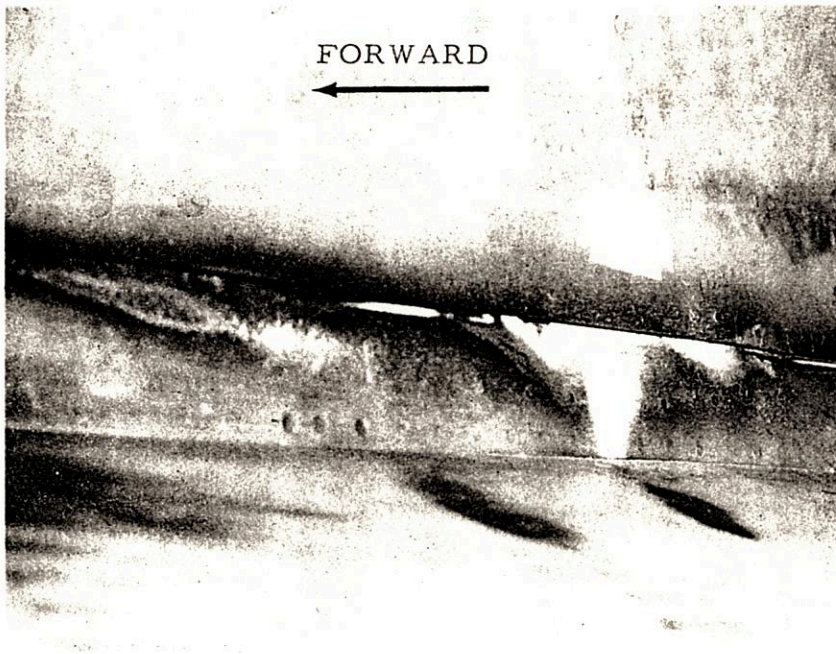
DAMAGED HORIZONTAL HINGE LINE, LEFT SIDE VIEW
